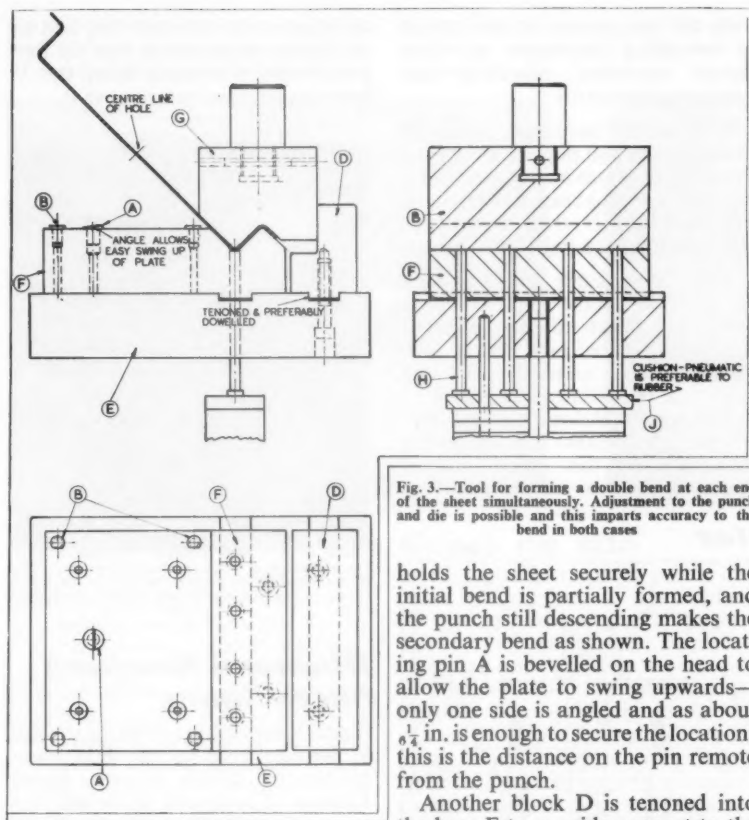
Tool for forming a double bend at each end of the sheet simultaneously. Adjustment to the punch and die is possible and this imparts accuracy to the bend in both cases
